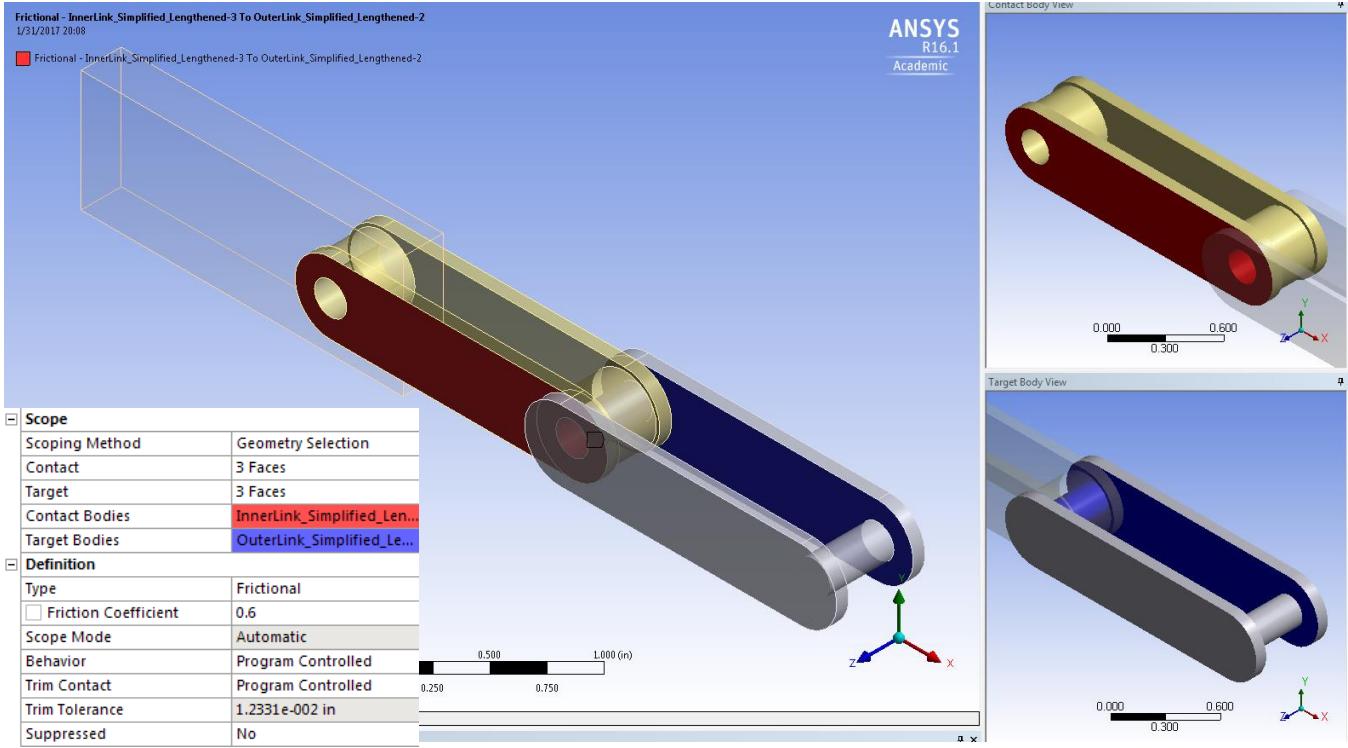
Contact between links. Left window: Overview. Top right: Cutaway view of contacts on inner link (in red). Bottom right: Cutaway view of contacts on outer link (in blue).
